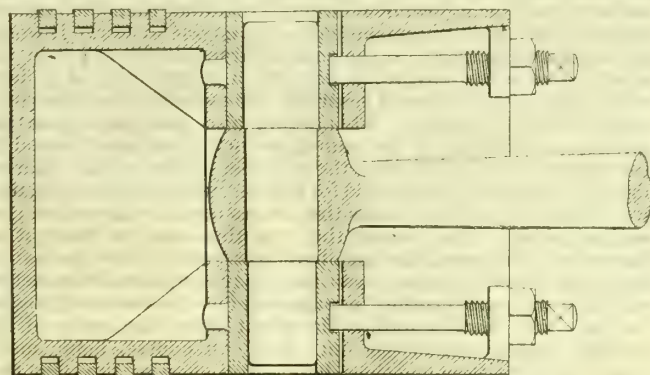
PISTON OF SMALL ENGINE, SHOWING METHOD OF TAKING UP WEAR AT CROSSHEAD.
